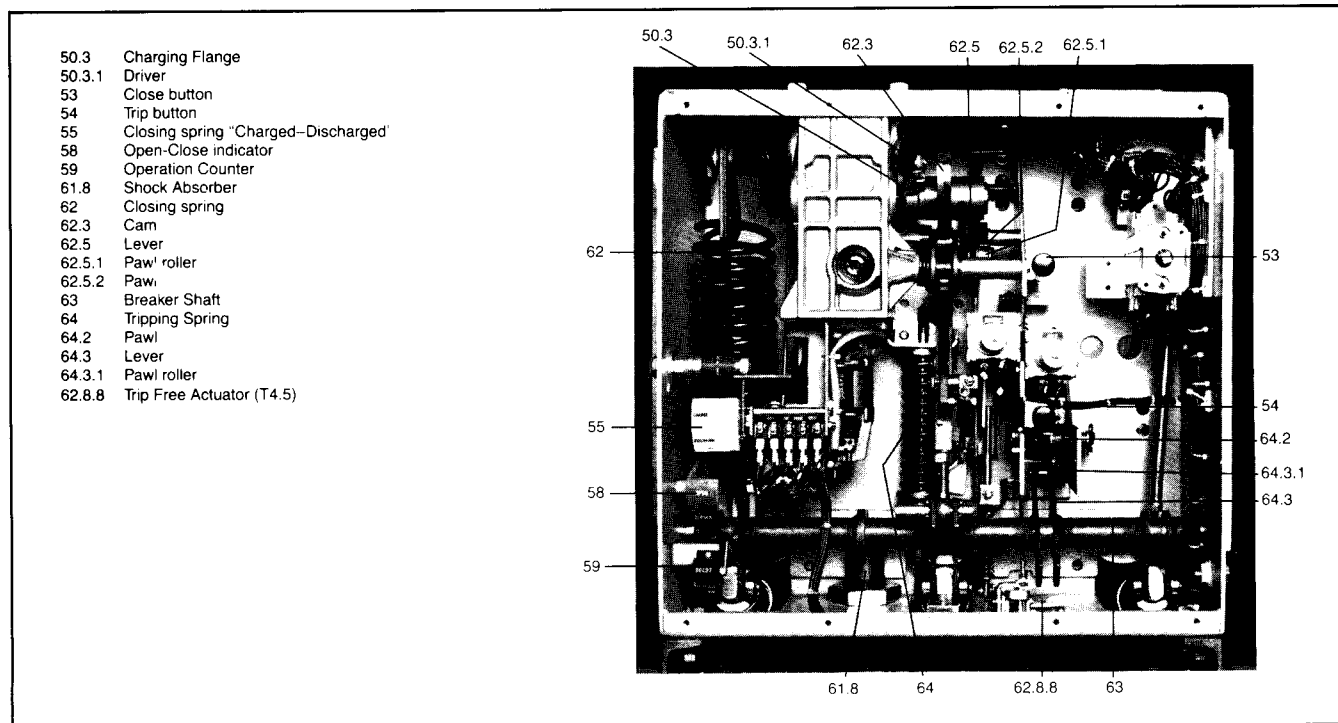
Operating Mechanism Open Position—Closing Spring Charged
